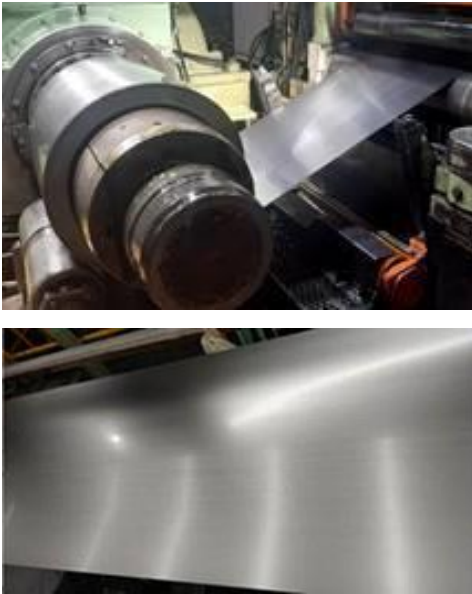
Photographs of cold-rolled Ti-5Al-1Fe strip manufactured at a production mill [6, 7].
